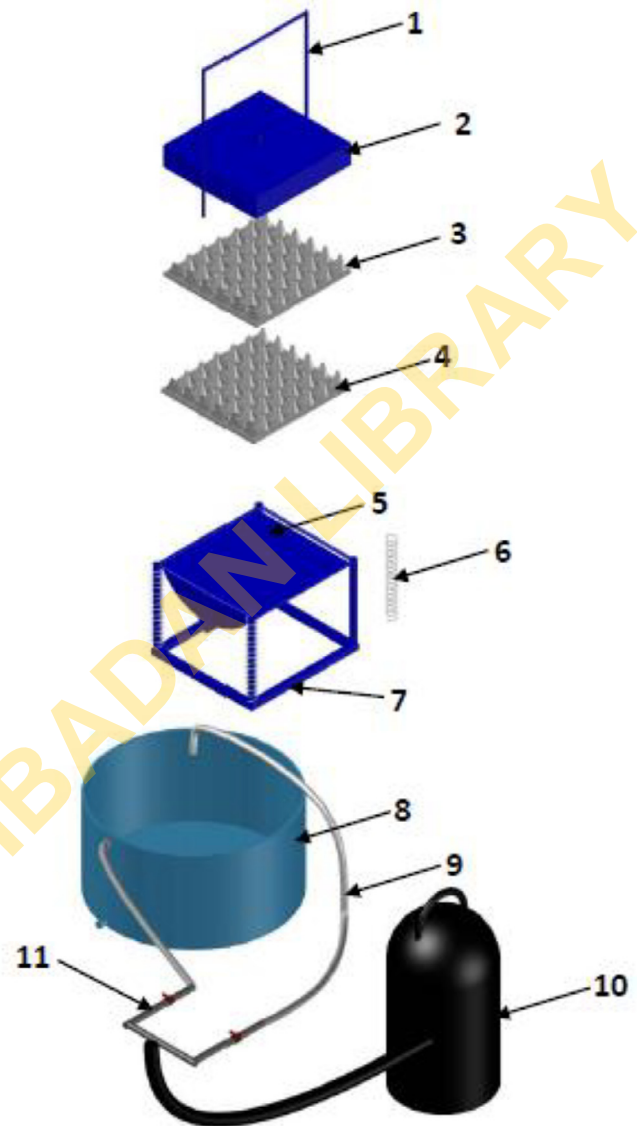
Exploded View of the Paper Egg Tray Machine.
